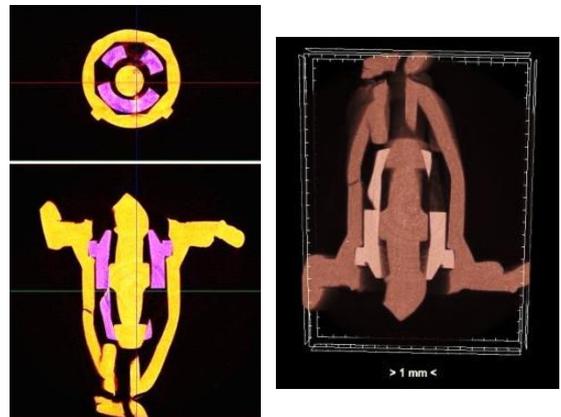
A cut through seal of the PL type deformed by heat (120°C) and a 3D model of the destroyed seal
